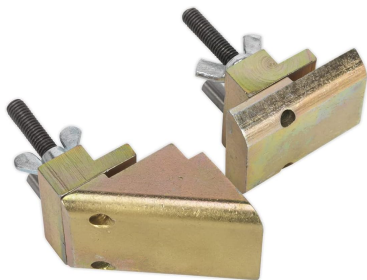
A detailed view of the two individual tools, highlighting their robust metallic construction and the threaded adjustment mechanisms.
